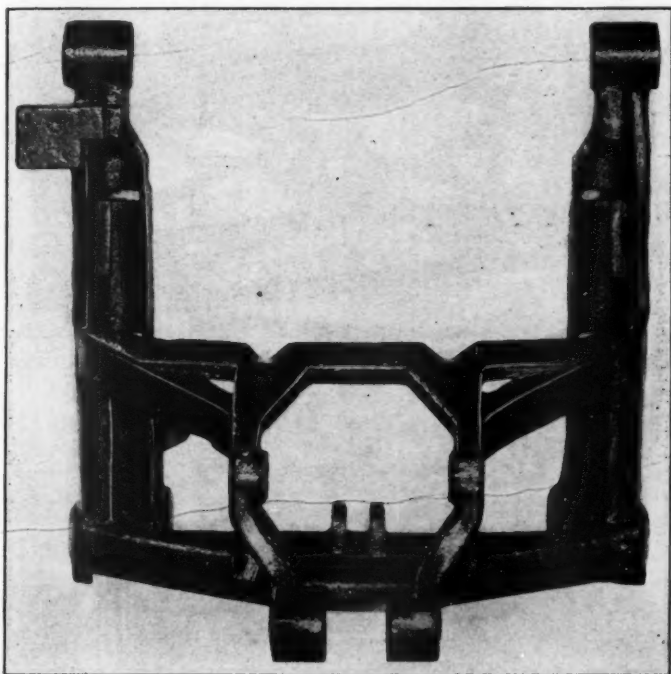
A CASTING DESIGNED TO ELIMINATE MACHINED JOINTS
